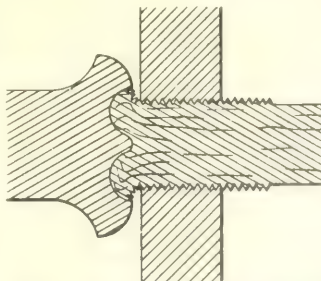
DESIGN OF TOOL FOR FORMATION OF BOLT HEAD.
